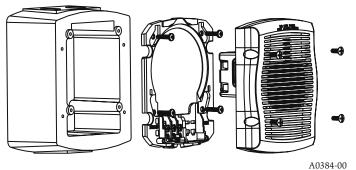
OUTDOOR CEILING MOUNT PRODUCT WITH PLASTIC WEATHERPROOF BACK BOX:
